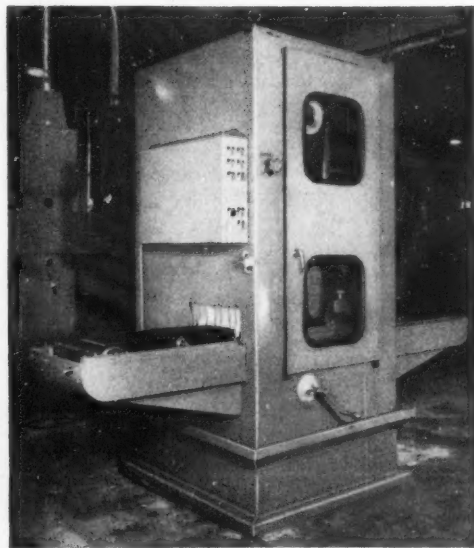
Churchill-Curtis Type 600C conveyor-type abrasive-belt grinding machine
